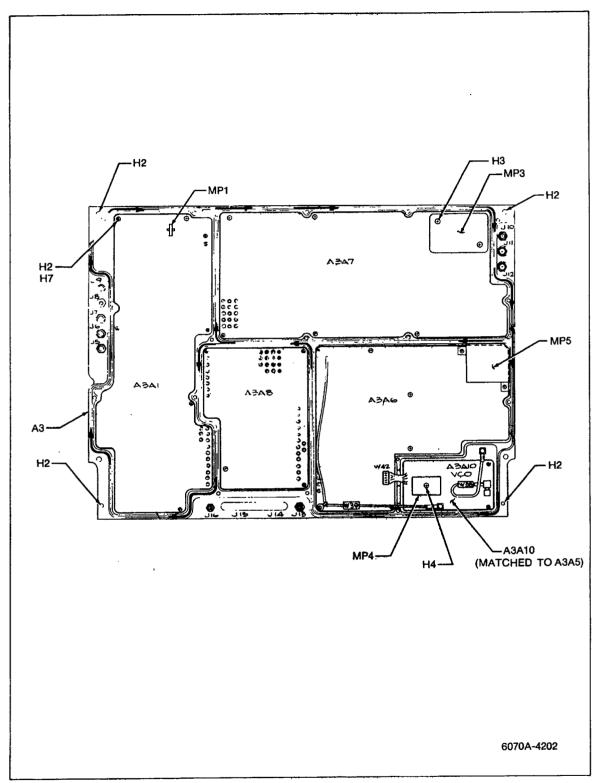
A3 Synthesizer Module Assembly (cont)
